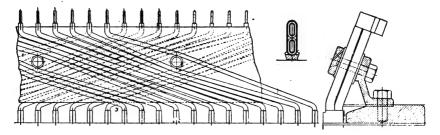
Barrel Winding of Stator supported by Internal Ring of Metal bolted to Brackets,
